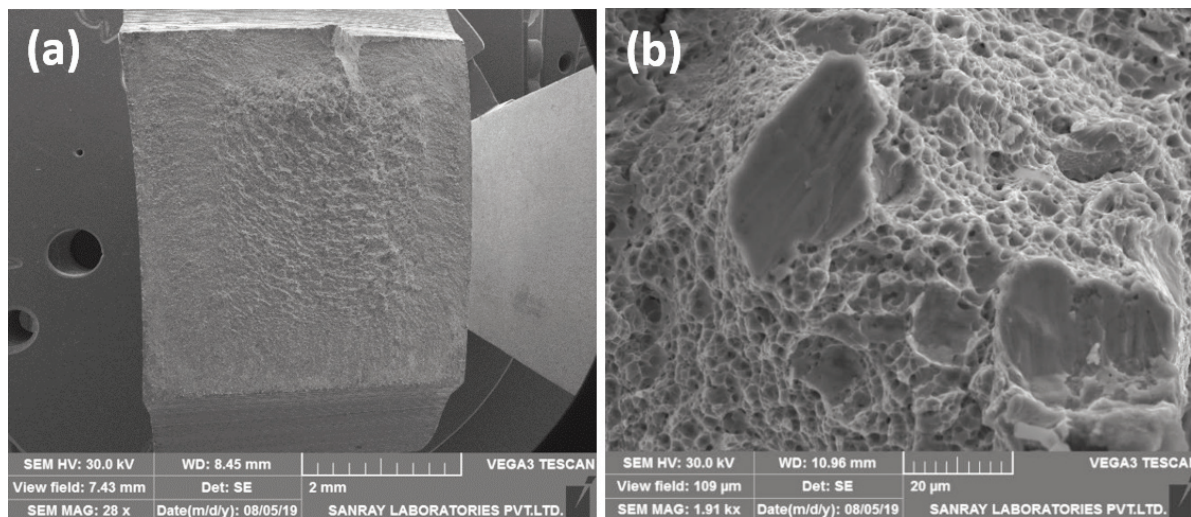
Fractography of the tensile test specimens of AISI 9315 steel obtained at a) 470X (b) 1.9kX
